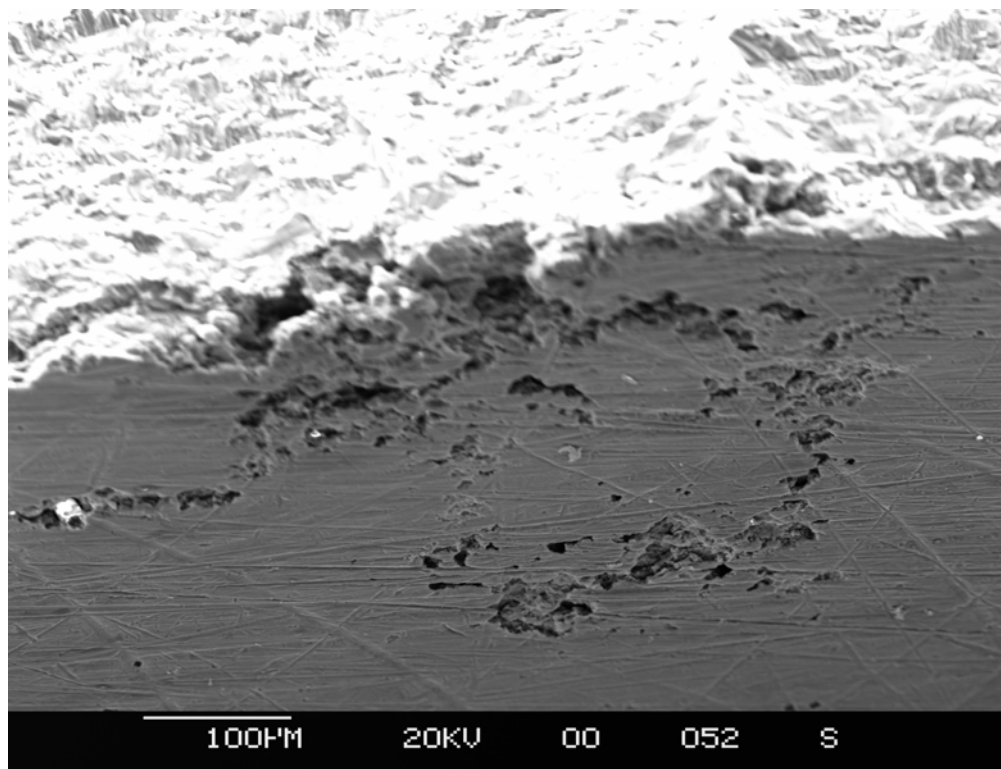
Surface View of Crack Origin B (Fig. B-34) on Specimen 5877.
